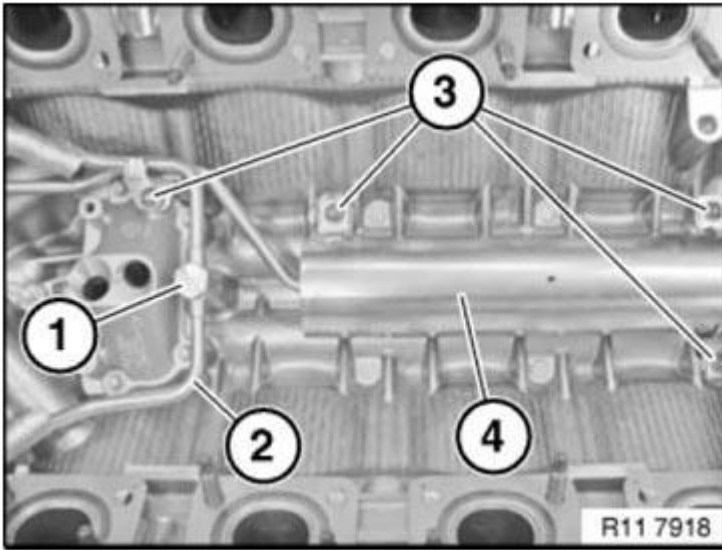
Identifying Banjo Bolt, Screws And Vacuum Reservoir
